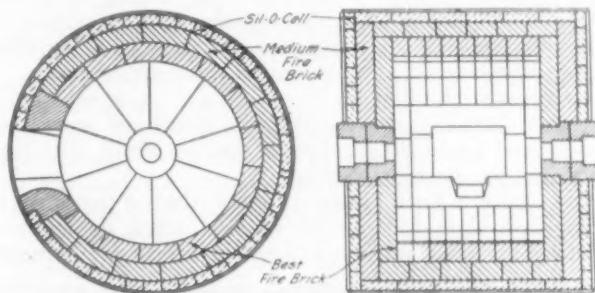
CROSS SECTION VIEW OF ROCKING ARC FURNACE. SHOWING METHOD OF LINING
